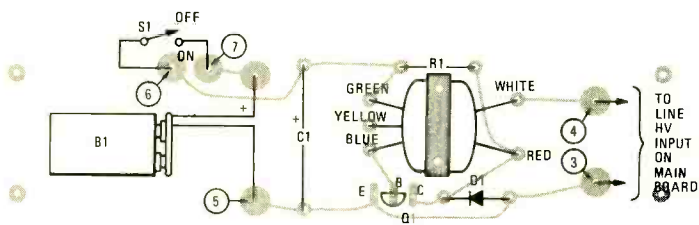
COMPONENT PLACEMENT of battery inverter board.
